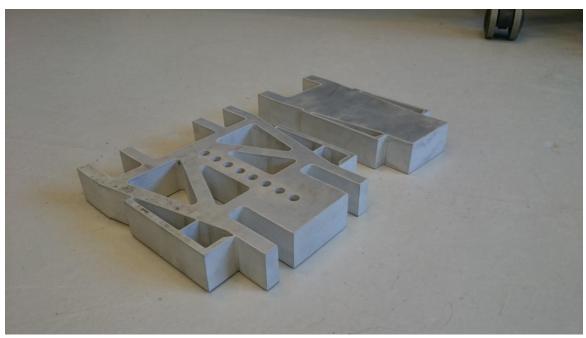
A picture of a set of suspension bridges taken straight out of the machine. For production purposes, I designed the suspension with supporting structure to make the further process of drilling hinge holes easier and more accurate. These supporting structures can later be cut away with a bandsaw.
